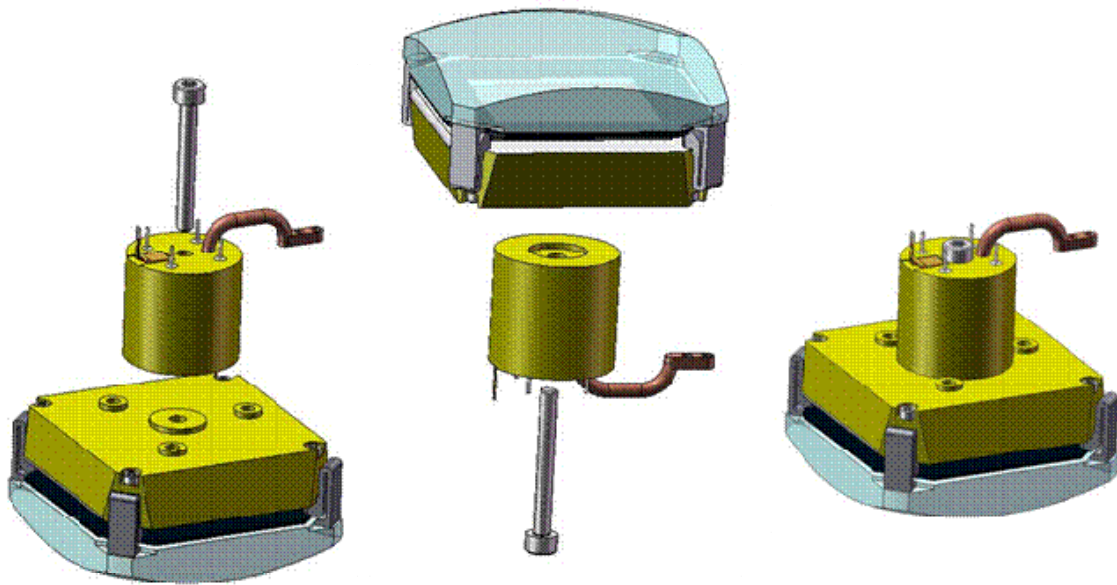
The CBA attaches to the FFLA/CCD assembly via a single screw.
